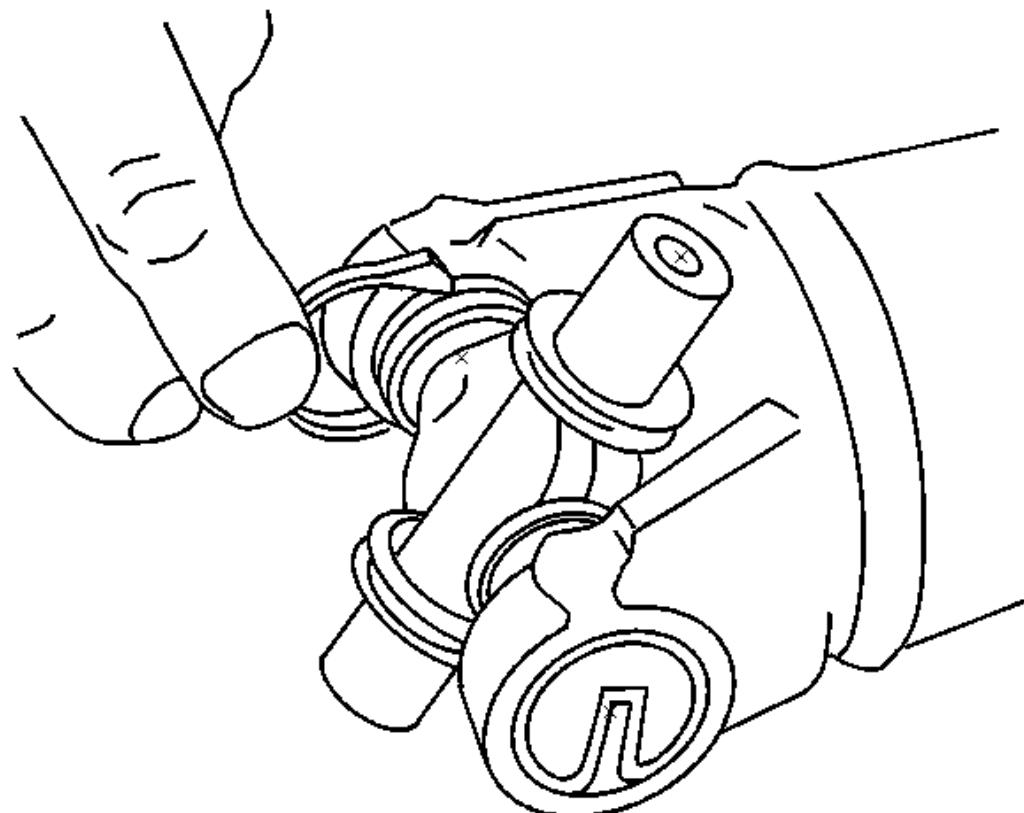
Assembling Bearing Retainer In Retainer Groove
